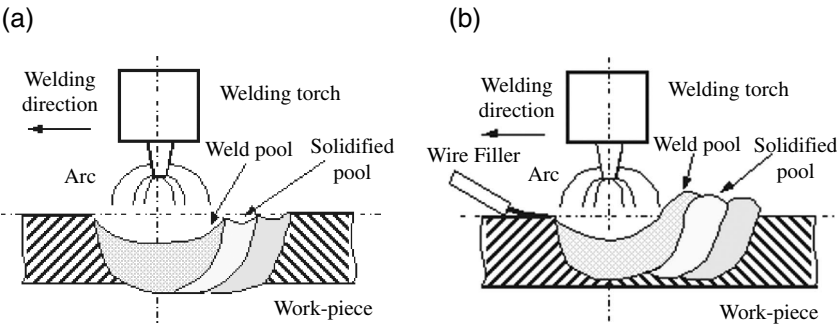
Definition for different type of the weld pool surface (a) Concave type (b) Convex type
